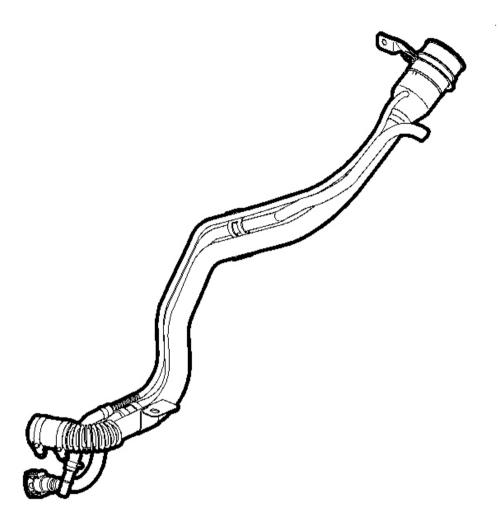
View Of Fuel Fill Pipe Courtesy of GENERAL MOTORS CORP.
